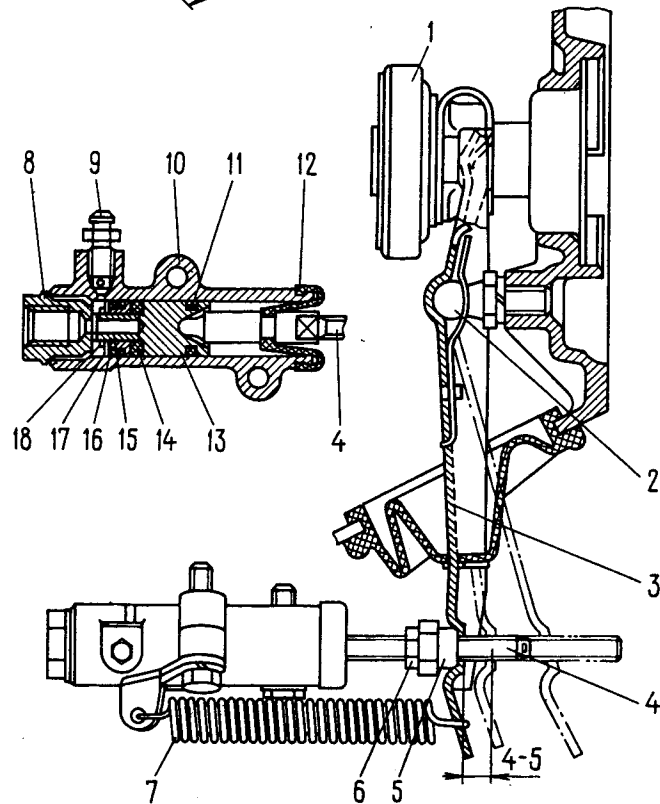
Clutch Operating Cylinder and Release Yoke:
